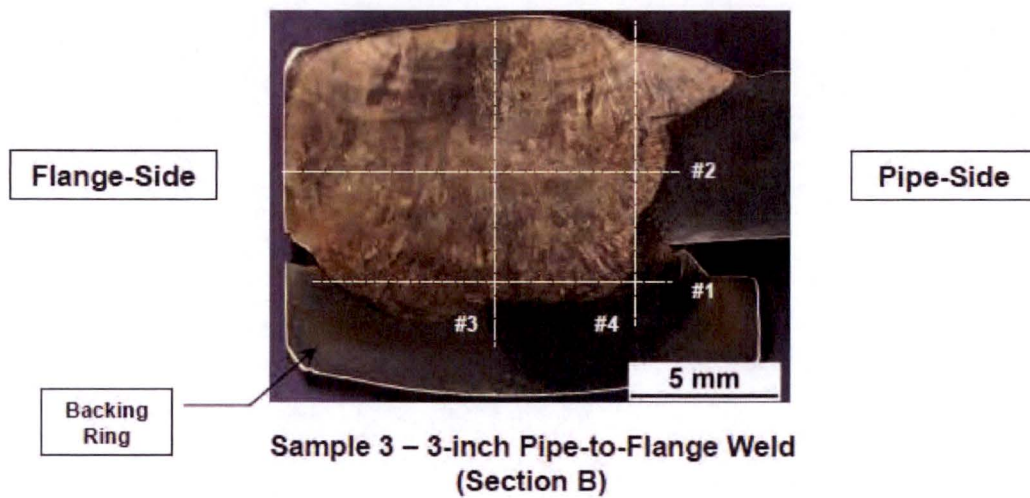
Sample 3 – 3-inch Weld Cross-Section
